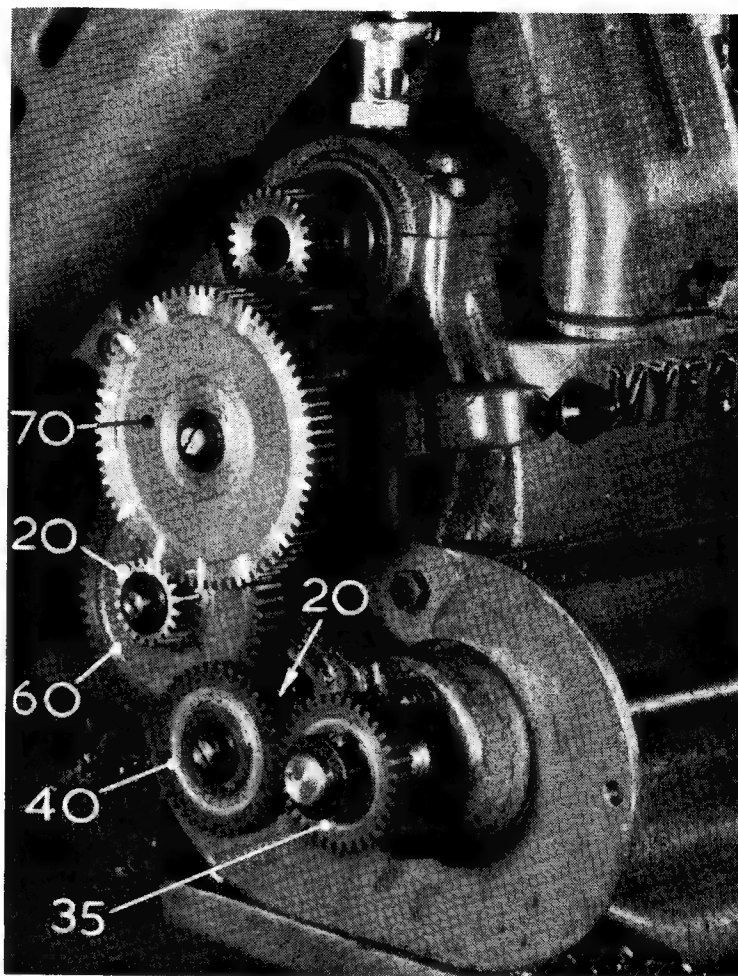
Changewheel set-up for helical gear-cutting. The leadscrew is geared up 12-1 to give a lead of $1\frac{1}{2}$ in., while the 70-tooth changewheel is indexed to give 14 teeth
